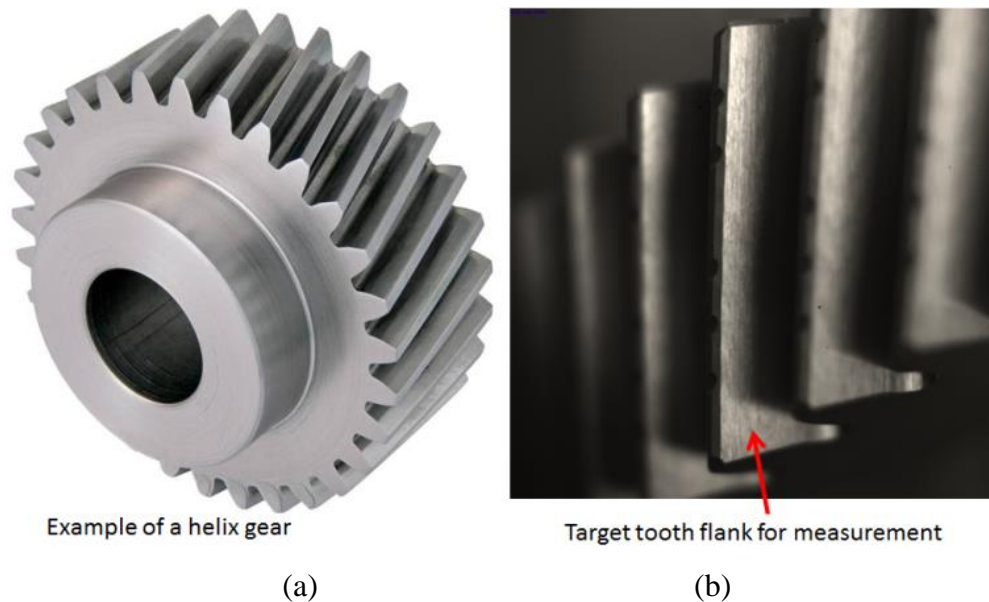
Helix gear tooth flank: (a) example of a helix gear, (b) target tooth for measurement
